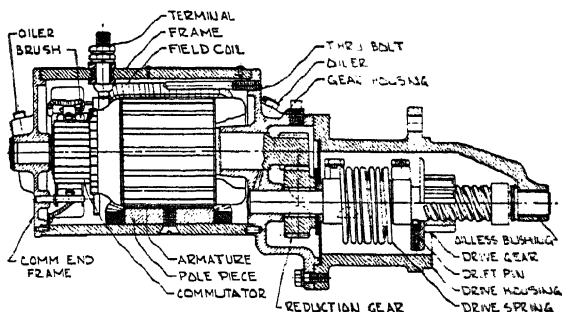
(Left).—STARTER-MOTOR CONNECTED TO PINION SHAFT BY MEANS OF GEARS
